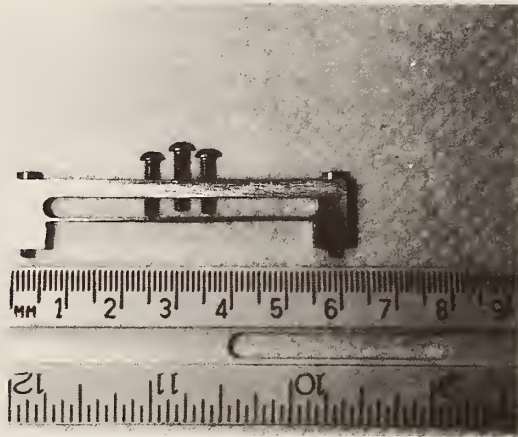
Clamp, incorporating a flex plate, for locking the sliding platen.
